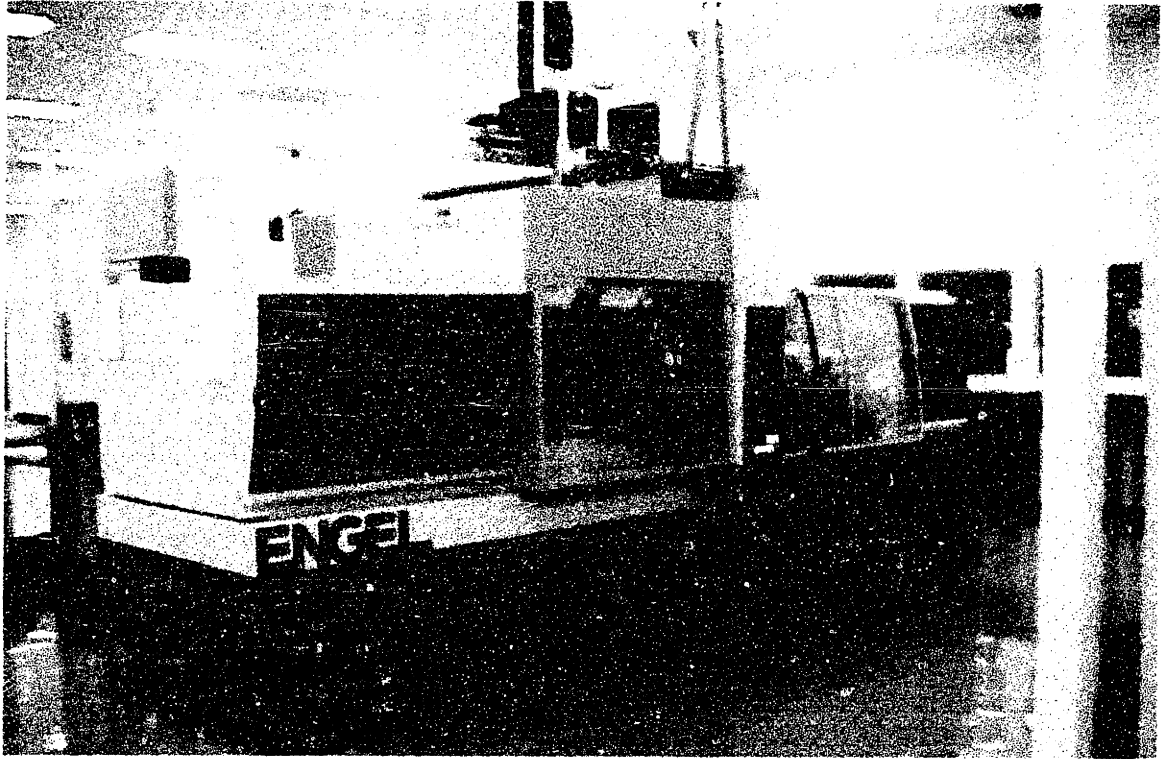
Engel Automated Plastic Injection Molding Equipment.
